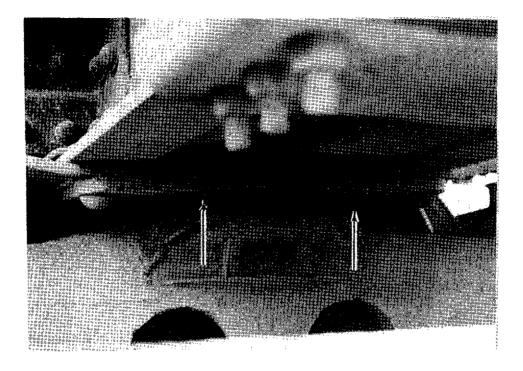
Fractured centerplate at "A" end of GN 78206.
